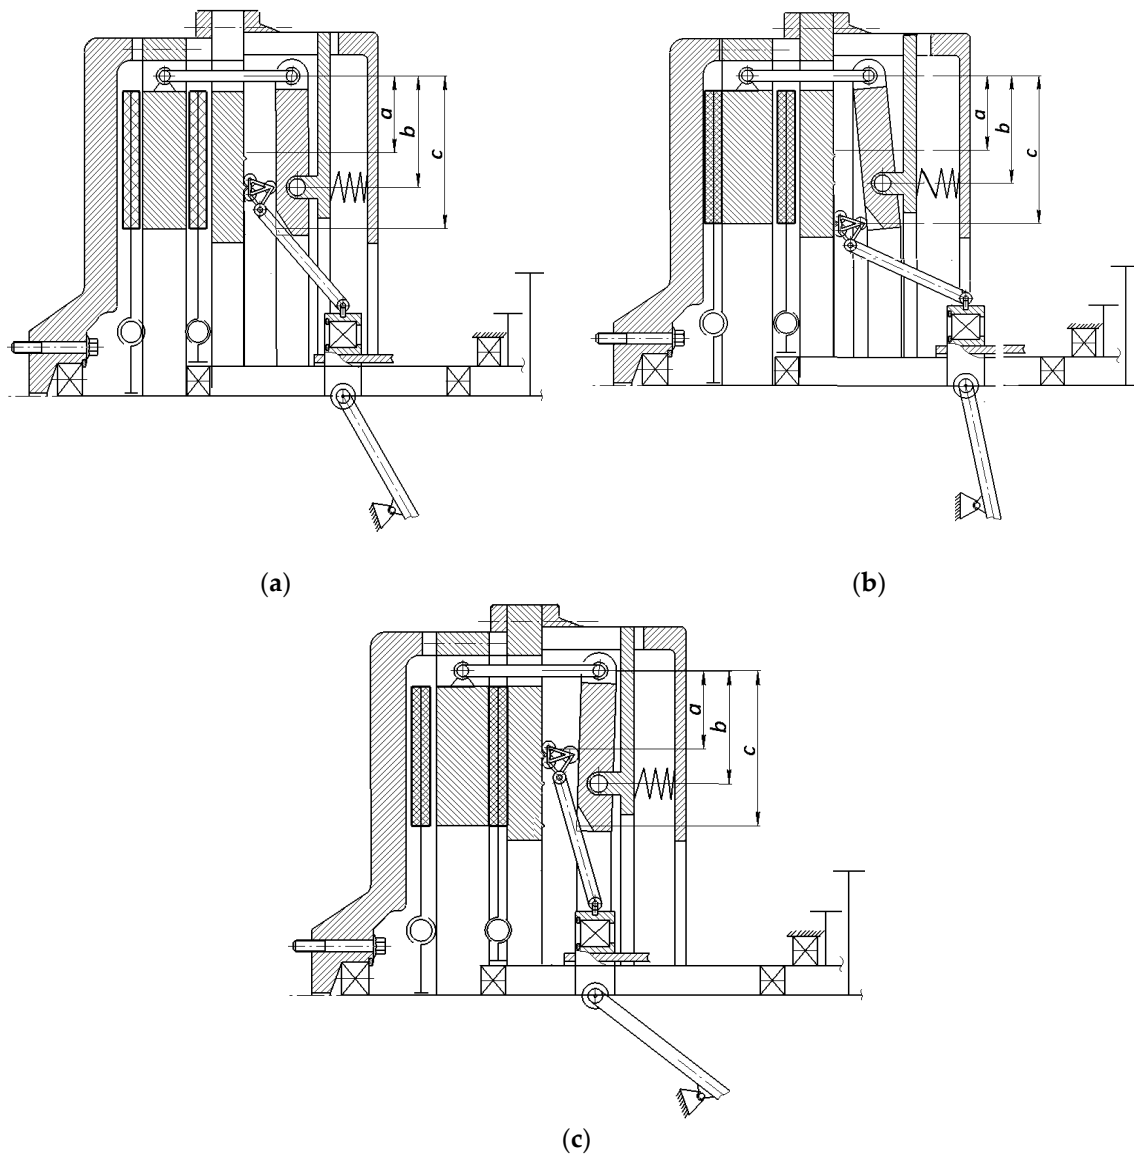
Positions of the movable carriage of the control mechanism: (a)—neutral position; (b)—1st clutch; (c)—2nd clutch; a —length determining the position of the carriage under switched-on 2nd clutch, b —length determining the position of the carriage under switched-off 1st and 2nd clutches, c —length determining the position of the carriage under switched-on 1st clutch.
